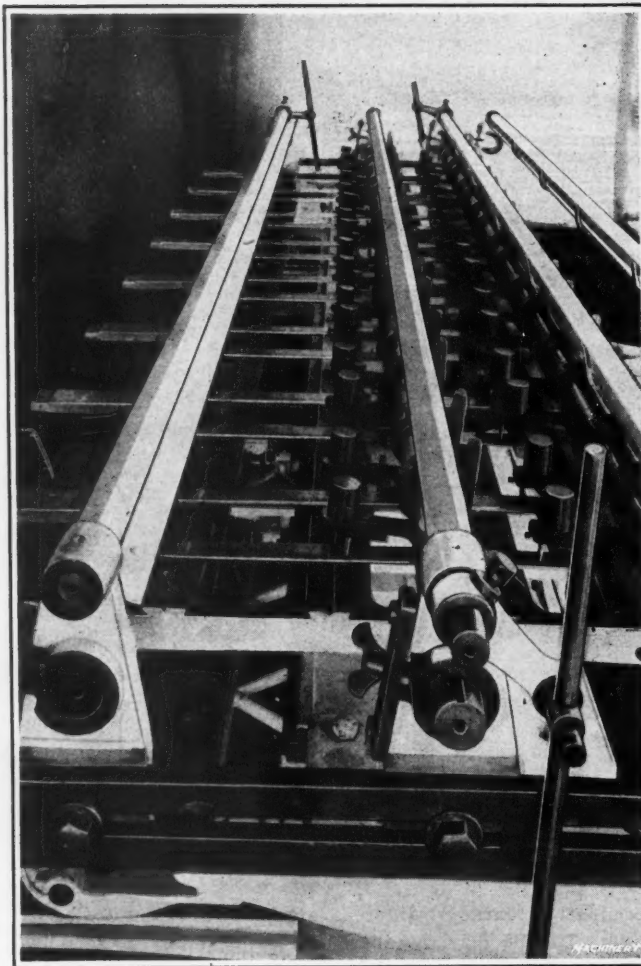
Close View of Work-holders and Graduating Tools on Hope Machine
